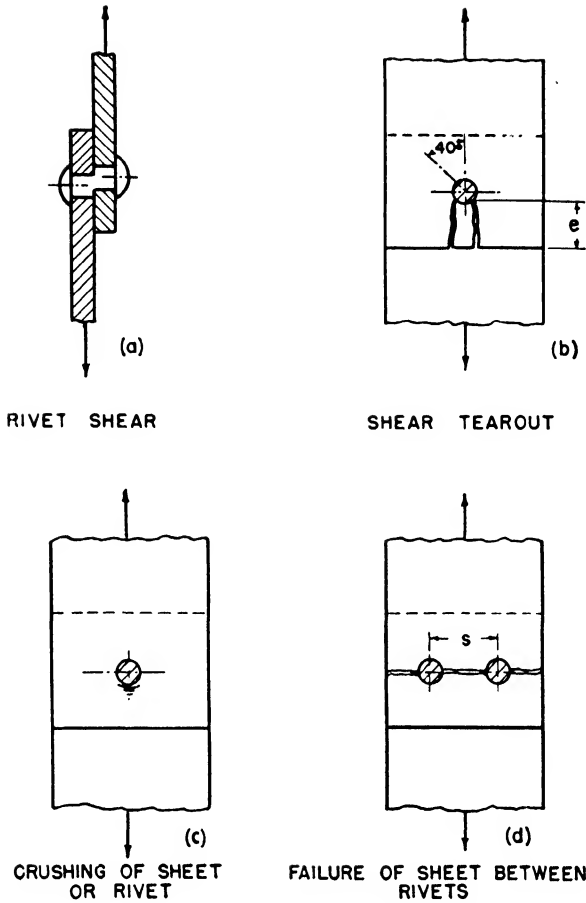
Types of Failure of Riveted Joints.
